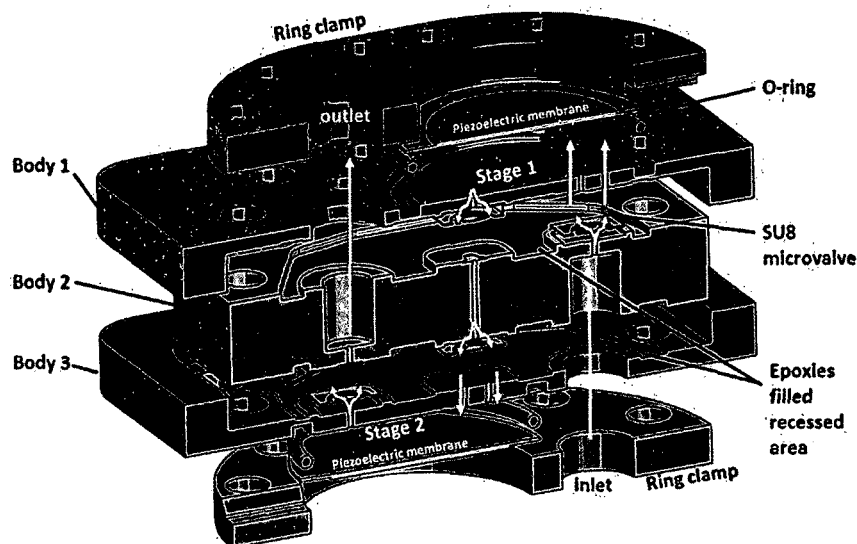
Cross-section and exploded view of the two-stage microcompressor design.
